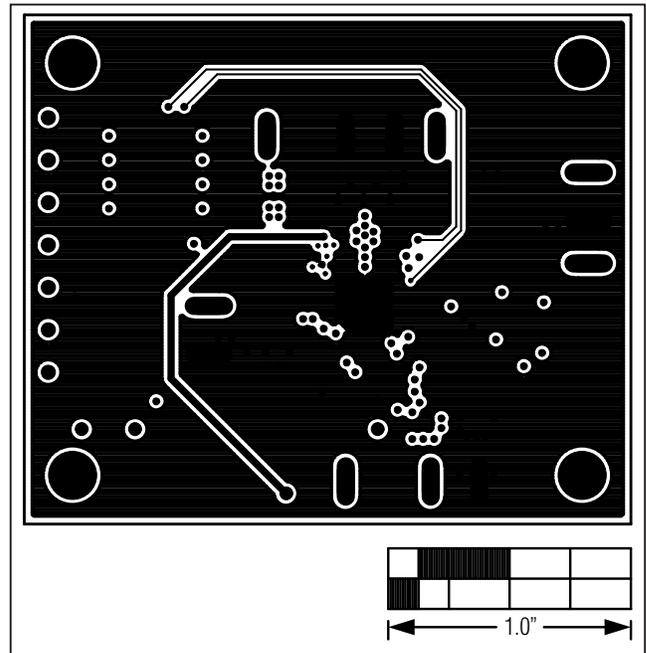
MAX17019N EV Kit PCB Layout—Layer 3
